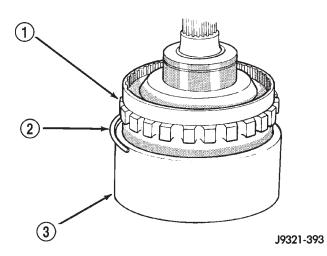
Clutch Drum And Outer Retaining Ring Installation
